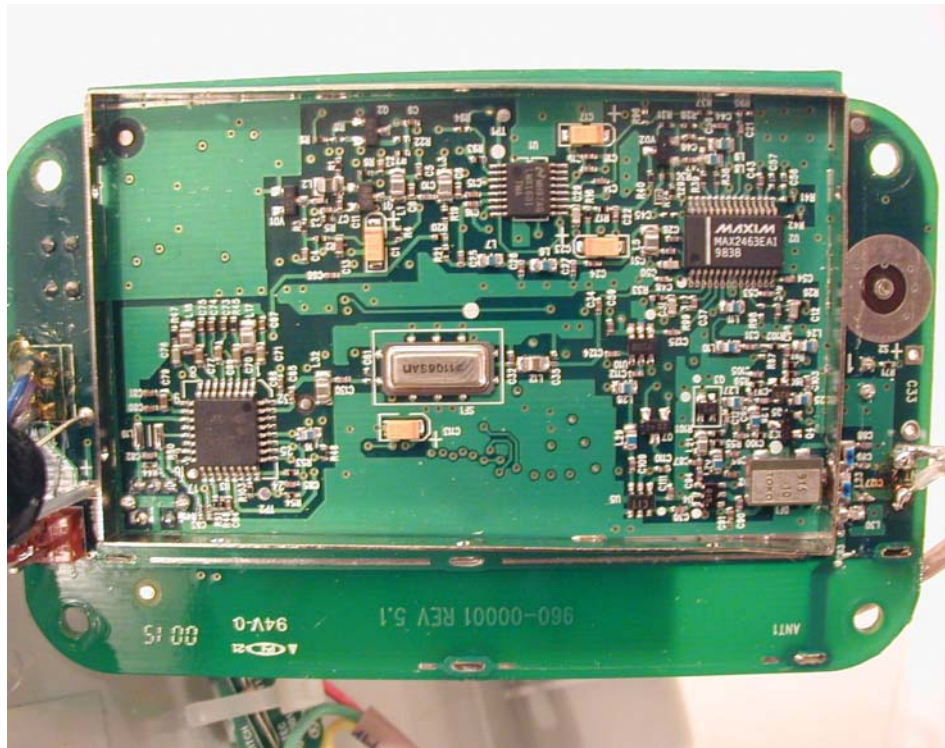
Main Board RF Section View (with Metal Shield Cover Removed)
